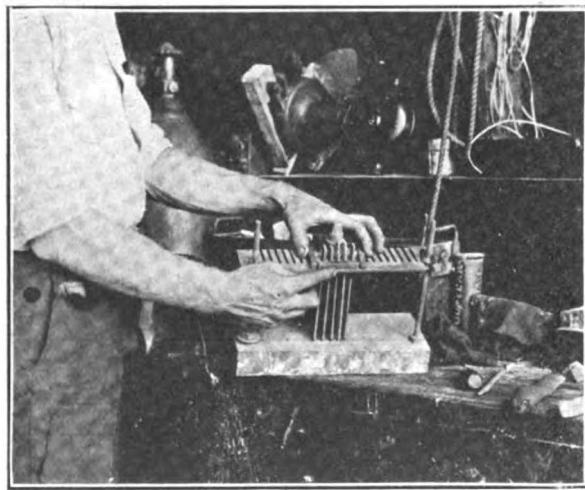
Showing the Arrangement of the Strips of Steel which Form the Mold for the Plate Strap Connectors.
